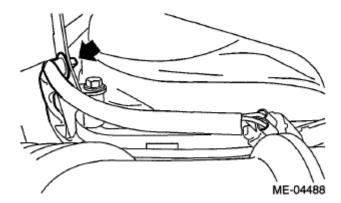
Locating Engine Harness Clip Courtesy of SUBARU OF AMERICA, INC.
